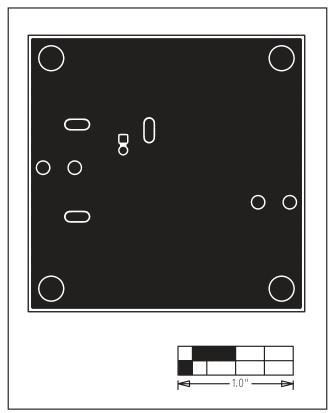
MAX9890 EV Kit PCB Layout—Solder Side
